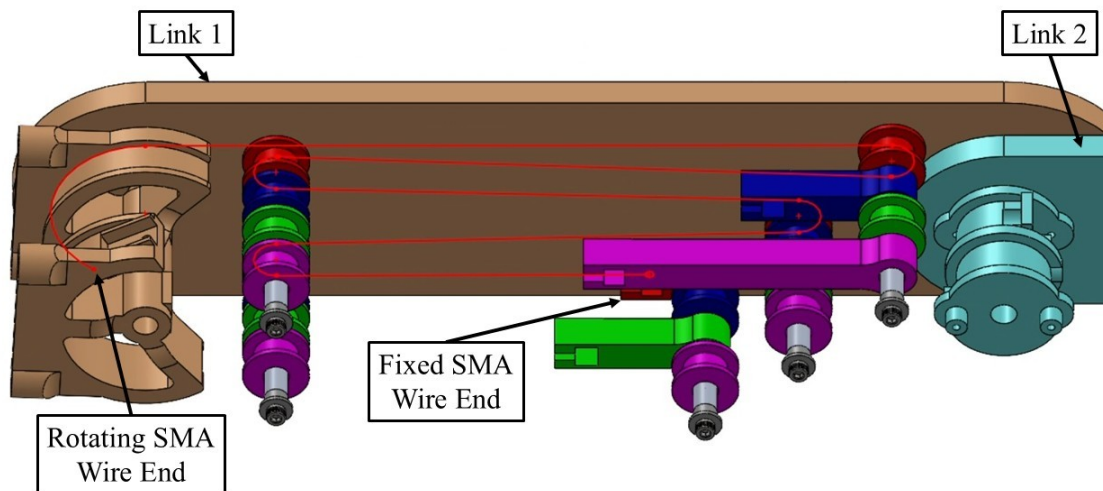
Link 1 assembly showing link 1 and 2 components, wire rollers, and fixed wire ends. The path of the joint 1 counterclockwise (CCW) actuator is shown in red.
